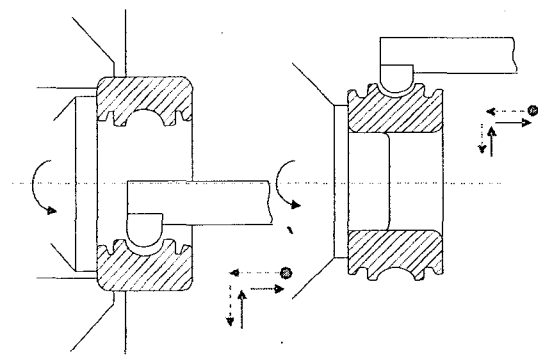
A turning process of the bearing outer ring(a) and inner ring(b) raceway
